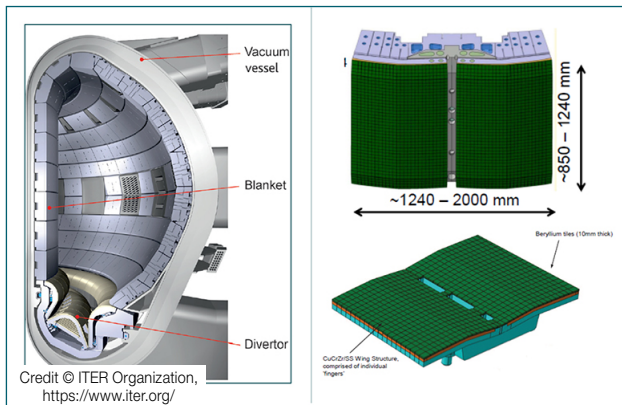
Position of the FWPs inside the vacuum vessel, overall dimensions and main structure.
